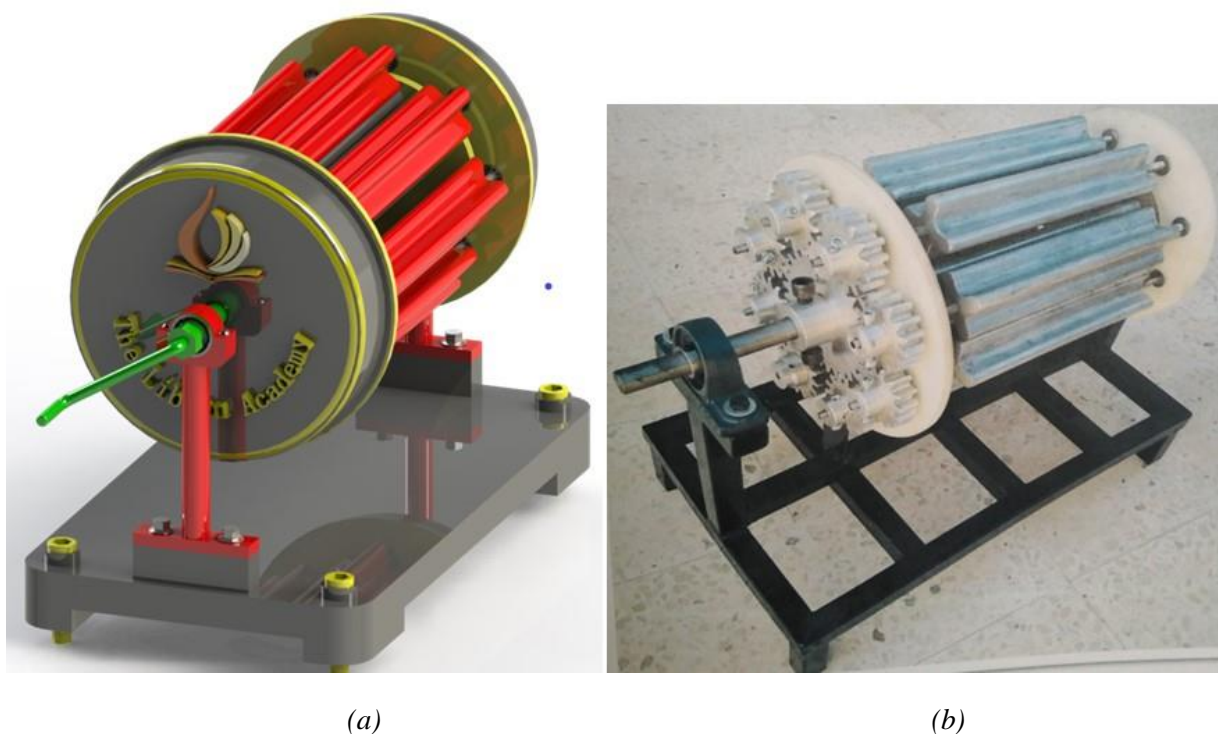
(a) Final shape of designed machine's mandrel after modelling process, (b) Photo of real machine's mandrel after manufacturing process
